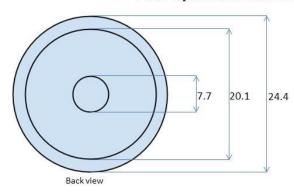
Fine Adjustment Knob Shaft Coupler Dimensions
